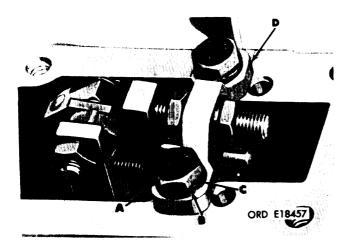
Removing stop plate and bridge assembly (code G pumps).
